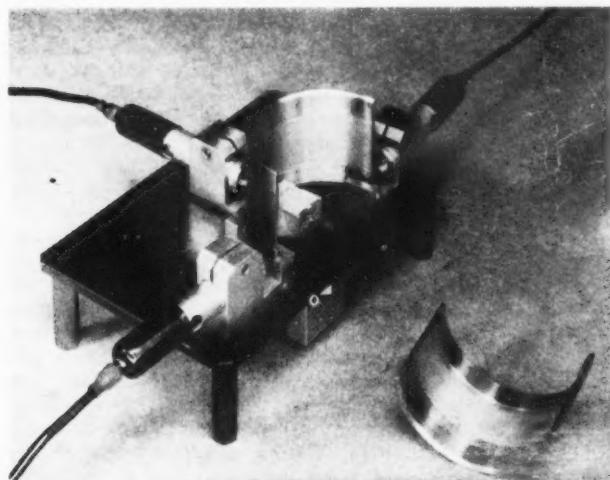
Three La Précision Mécanique Electronic Gauge Heads are Incorporated in this Fixture for Inspecting a Bearing Shell
